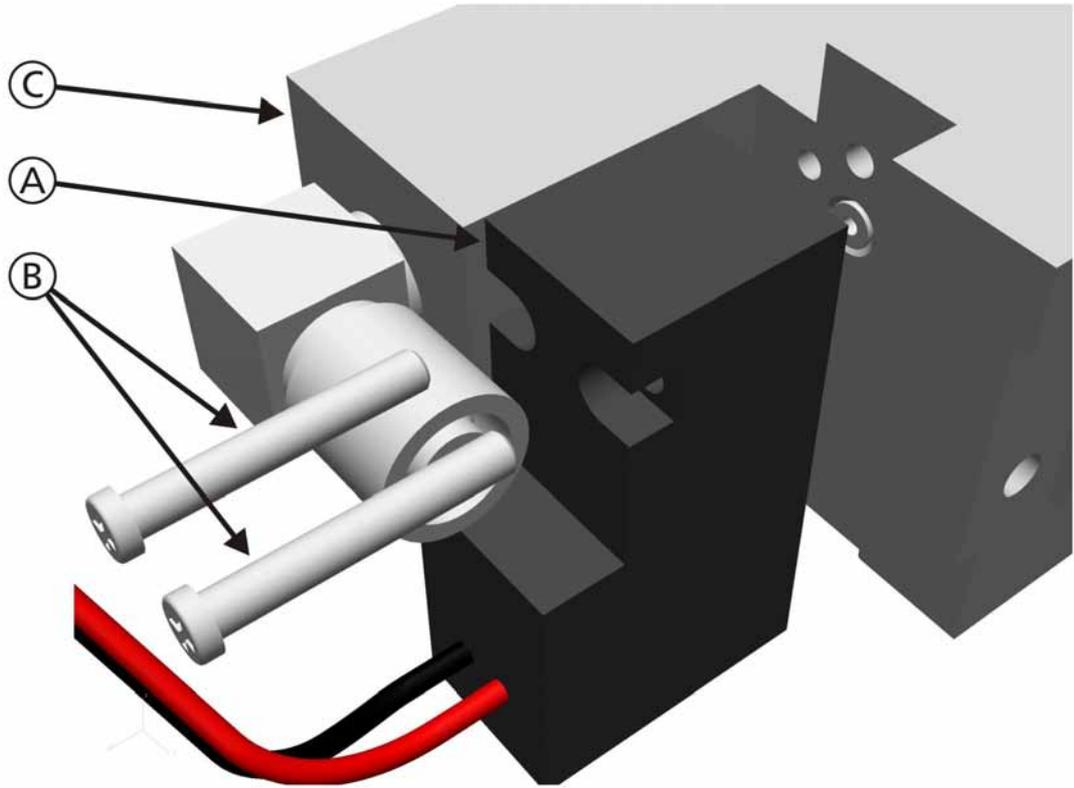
Oxygen Mixer Block Assembly, Step 1
